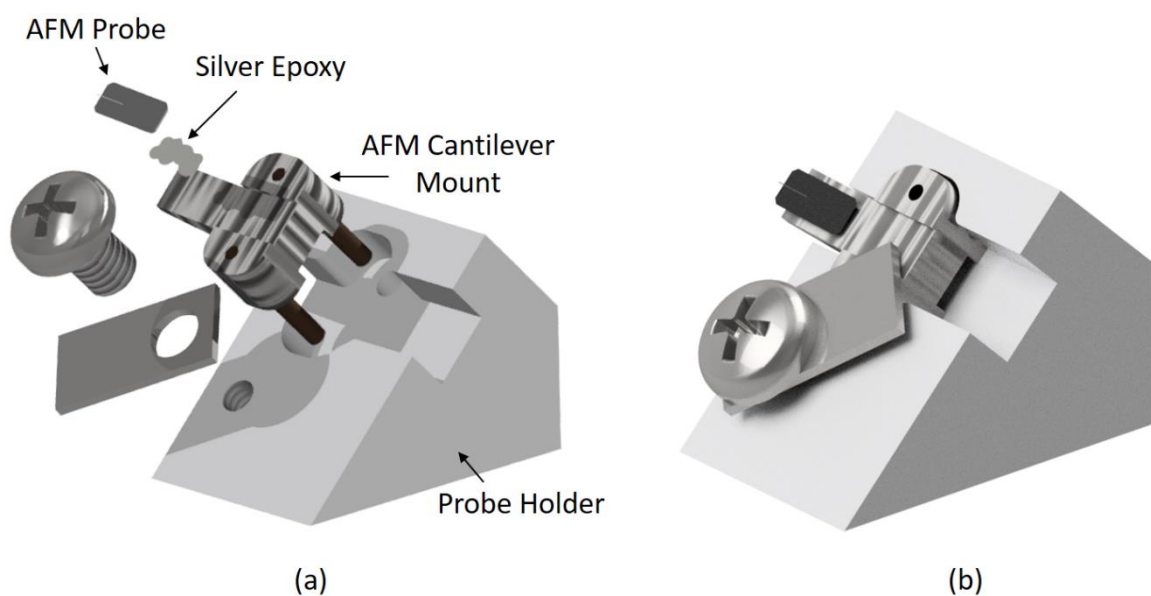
Rendered images of the designed and machined probe holder together with the AFM cantilever mount and the AFM probe in (a) exploded and (b) assembly views.
